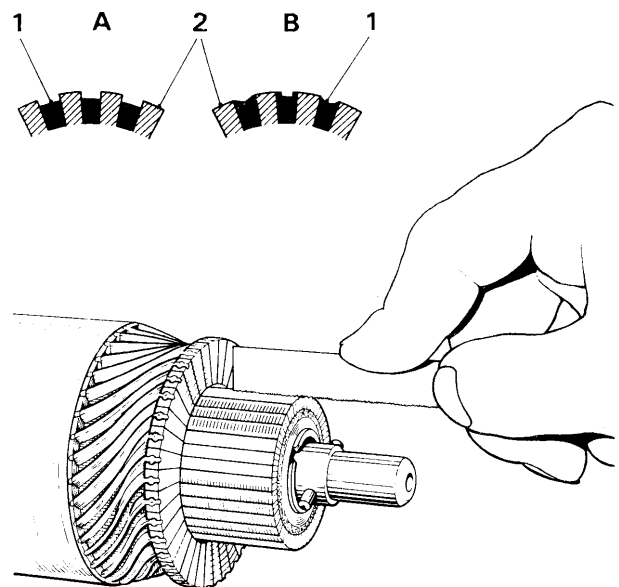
METHOD OF UNDERCUTTING INSULATORS
